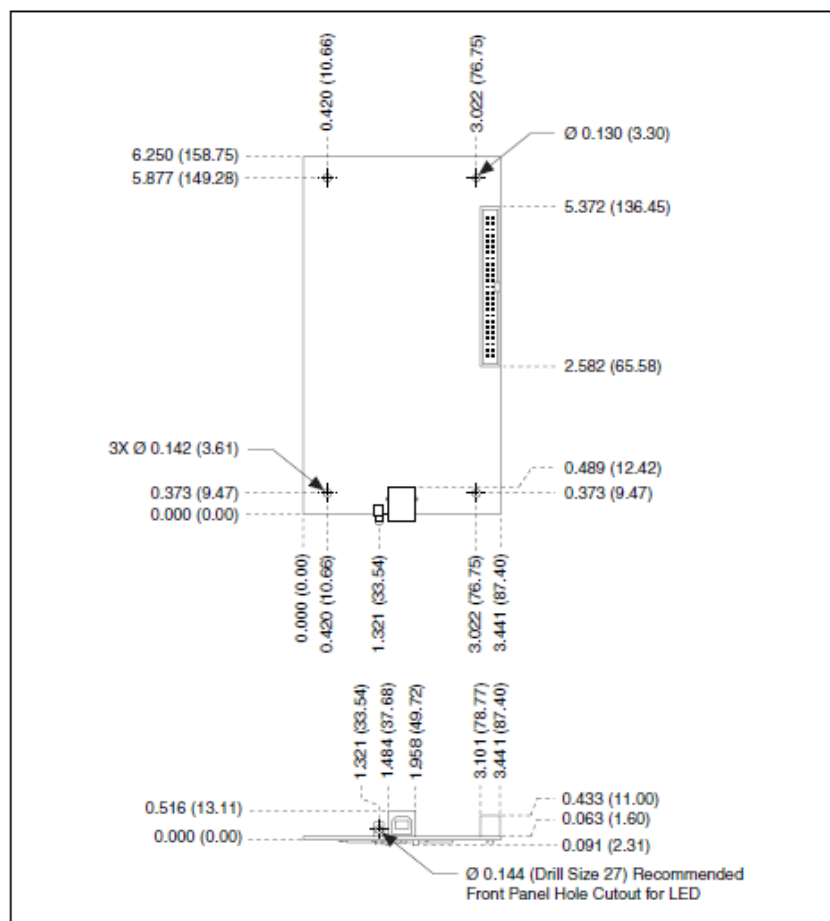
USB-6211 OEM Dimensions in Inches (Millimeters)
